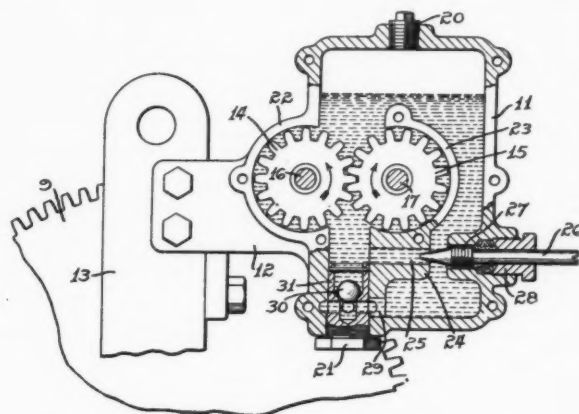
Retarding device which sets up back pressure to counteract driving force exerted on driven member
